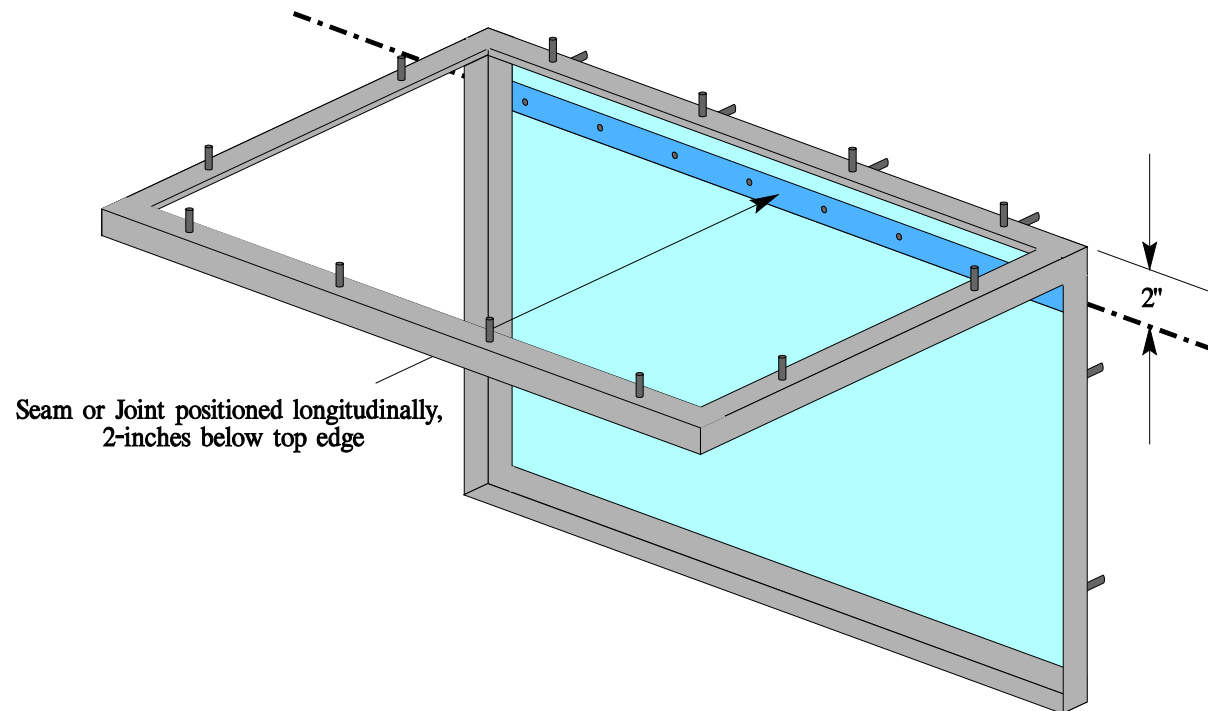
Arrangement for the Testing of Seams and Joints in the Compartment Sidewall
